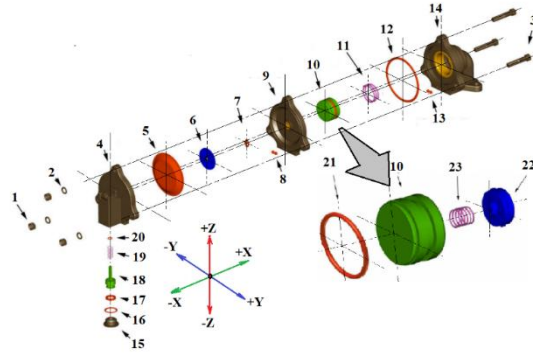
Another example is mechanical sensing valve needs to disassemble processes contains 23 parts.
